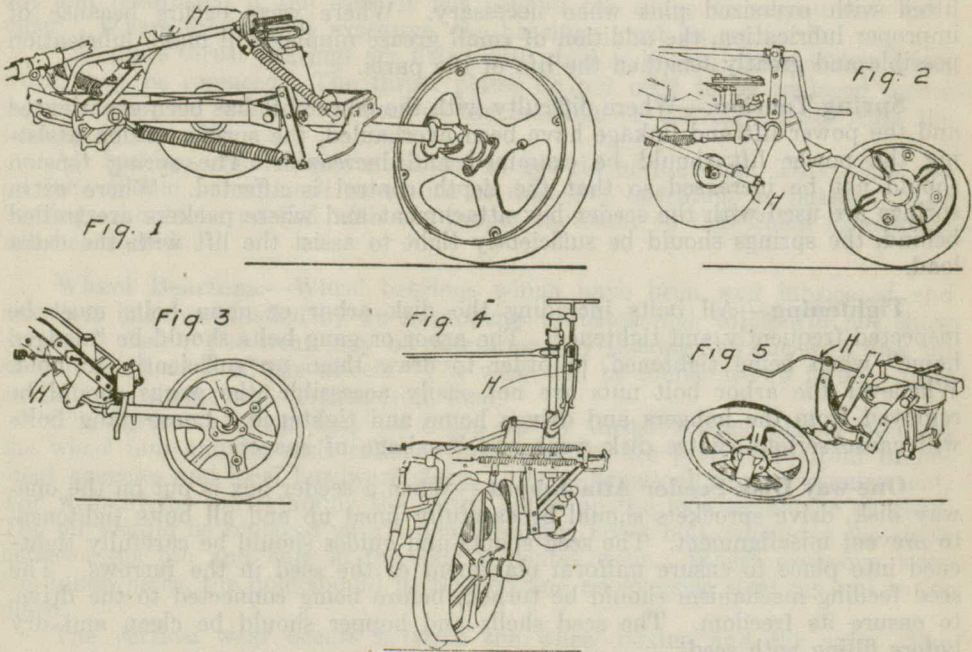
By lengthening an over head rod to hinge the rear wheel under the frame.
